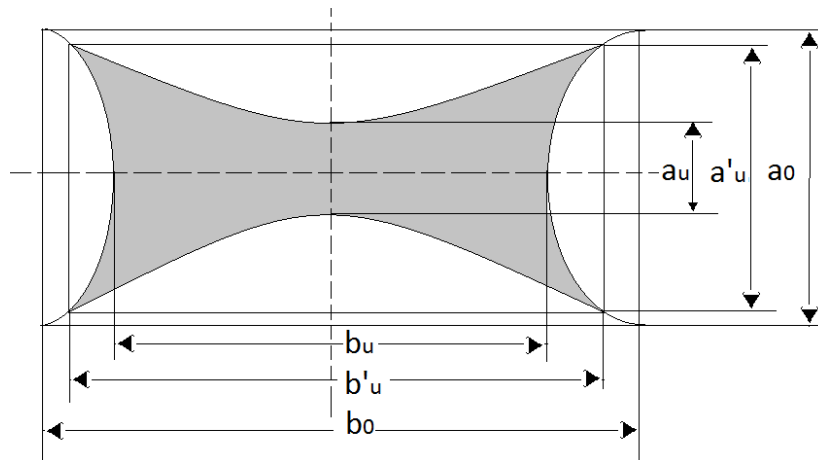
Dimensions of the rectangular specimen at fracture point;  $a_0$  - thickness of the specimen before fracture;  $b_0$  - width of the specimen before fracture;  $a_u$  and  $a'_u$  - the minimum and maximum thickness of the specimen at fracture point respectively;  $b_u$  and  $b'_u$  - the minimum and maximum width of the specimen at fracture point respectively
